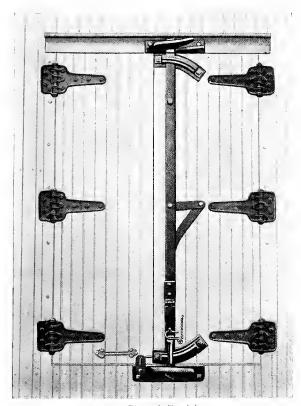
Arrangement and Details of Garland Refrigerator Car Door Fastener. Burton W. Mudge & Company.
